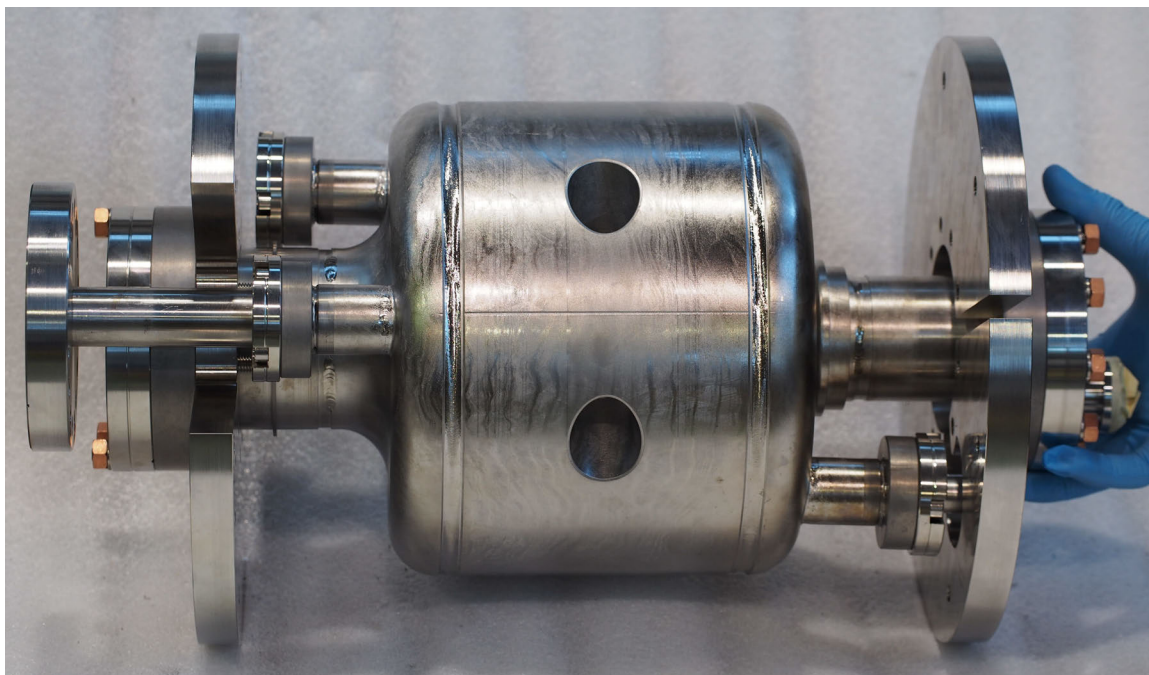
The completed niobium cavity. The cold test auxiliary components are partially installed in this picture, including the flange covers and stainless steel reinforcing plates.
